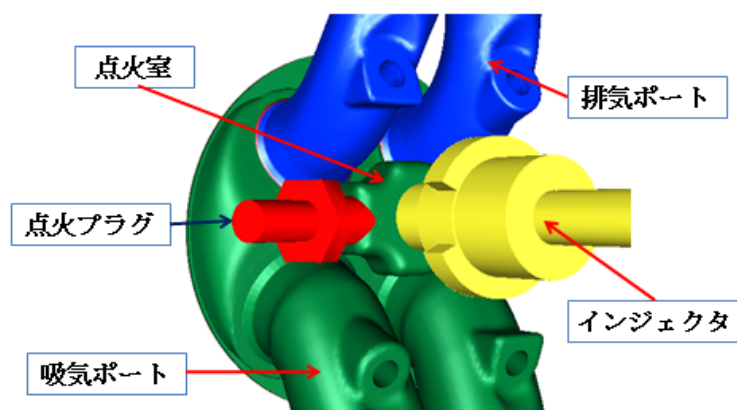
Sketch of the ignition-chamber GDI engine combustion system (swirl injector)
